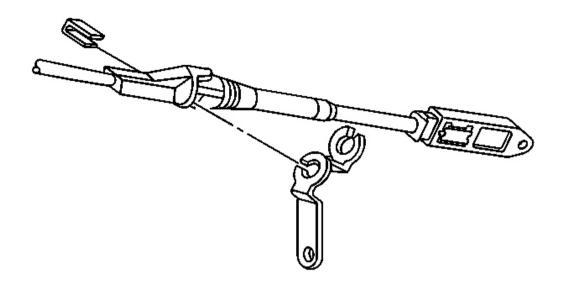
Shift Control Cable Bracket & Shift Control Cable Courtesy of GENERAL MOTORS CORP.
